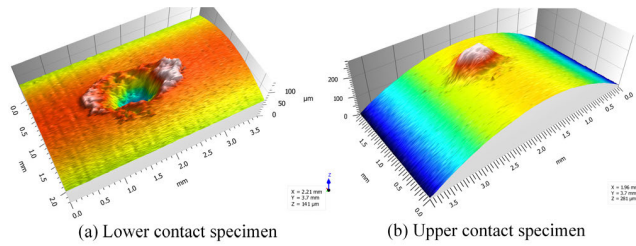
3-D surface profile of GIB electrical contact specimen.
